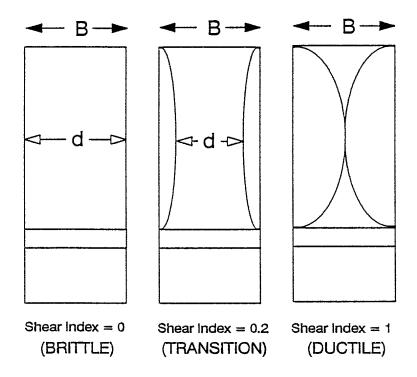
Typical Fracture Surfaces for Dynamic Tear Specimens
